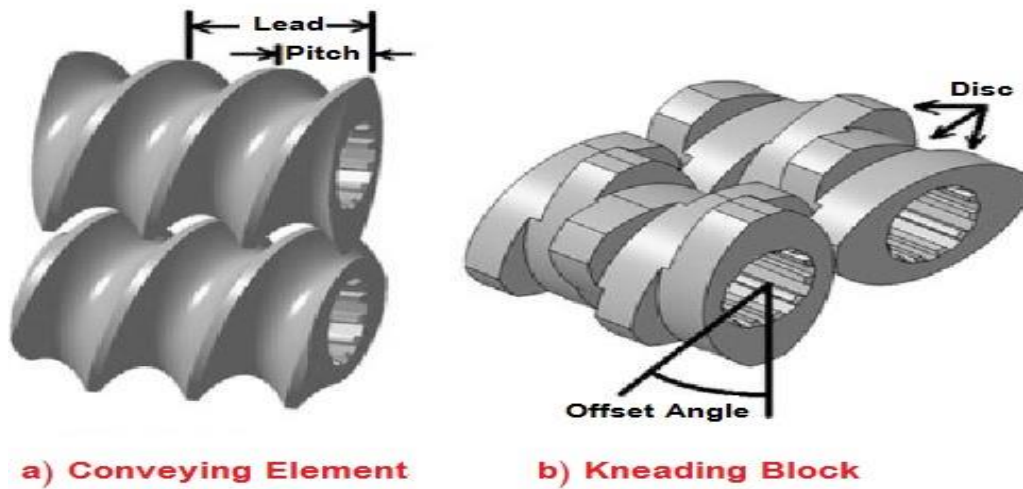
Screw elements; a) Conveying element, b) Kneading block [12]
